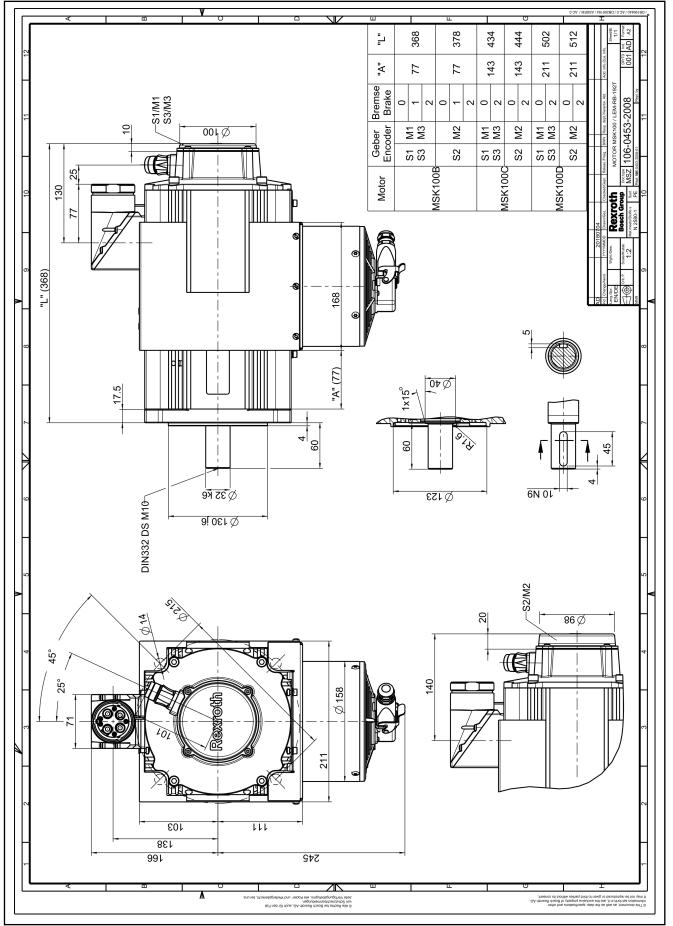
Dimension drawing MSK100 with radial fan unit
